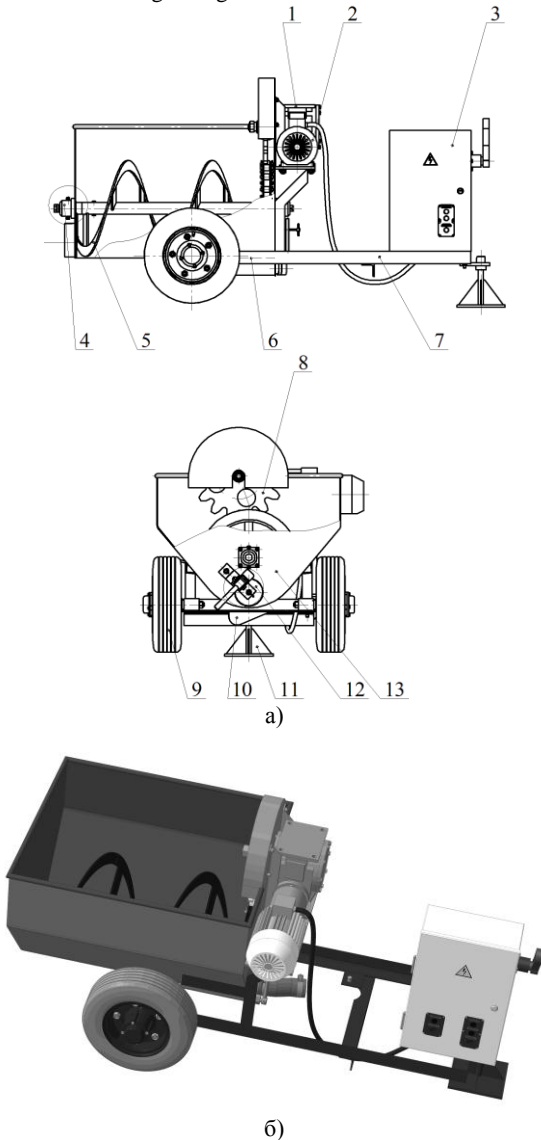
Mortar mixer [14]: a – is a constructive scheme: 1 – worm gearbox; 2 – electric motor; 3 – electric cabinet; 4 – tapered roller bearing; 5 – band-screw mixer; 6 – the filter grid; 7 – frame; 8 – tread gear; 9 – pneumatic wheel; 10 – camera-feeder; 11 – stand; 12 – valve design latch; 13 – housing; b – the overall view
